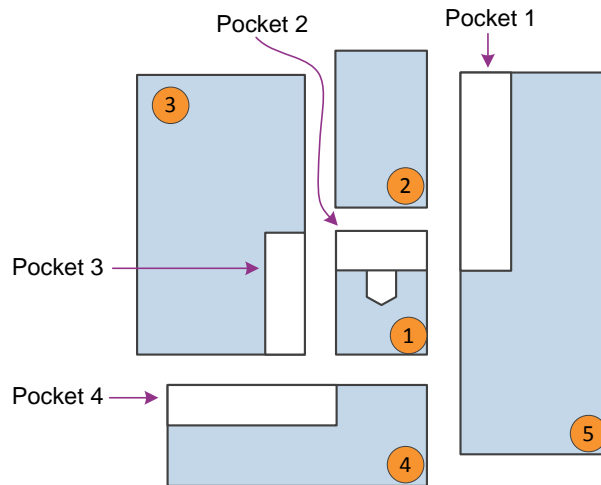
A sectional view of the decomposed subparts for test part I
